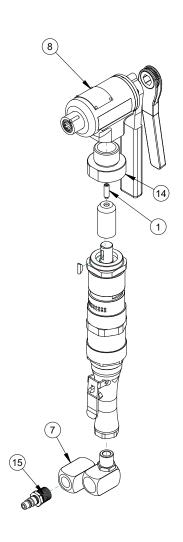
BOILER GUN BASE UNIT FEED WRENCH ASSEMBLY (P/N 99969)
